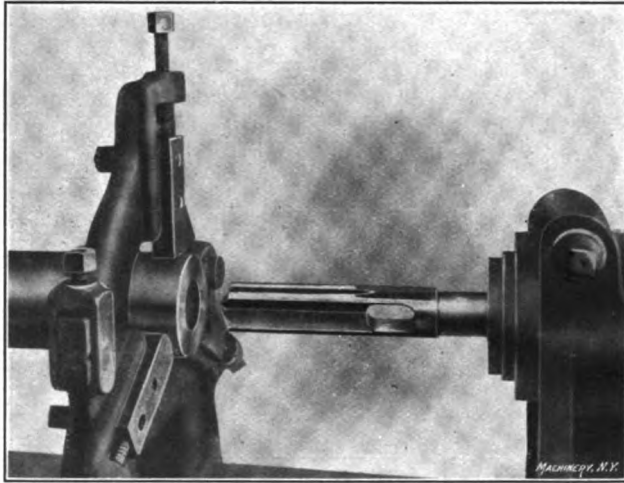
Showing the Guide Drawn Back to Expose the Drill.
